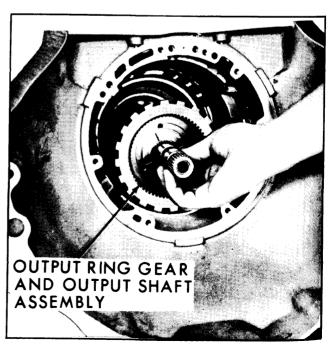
Removing Output Ring Gear and Shaft Assembly
